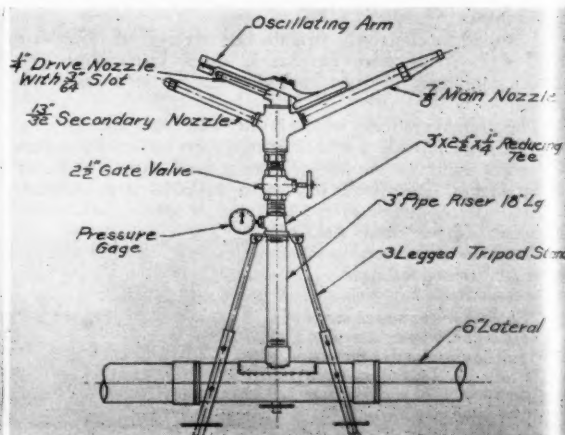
(Right) Tripod riser stand and sprinkler-head mounting
